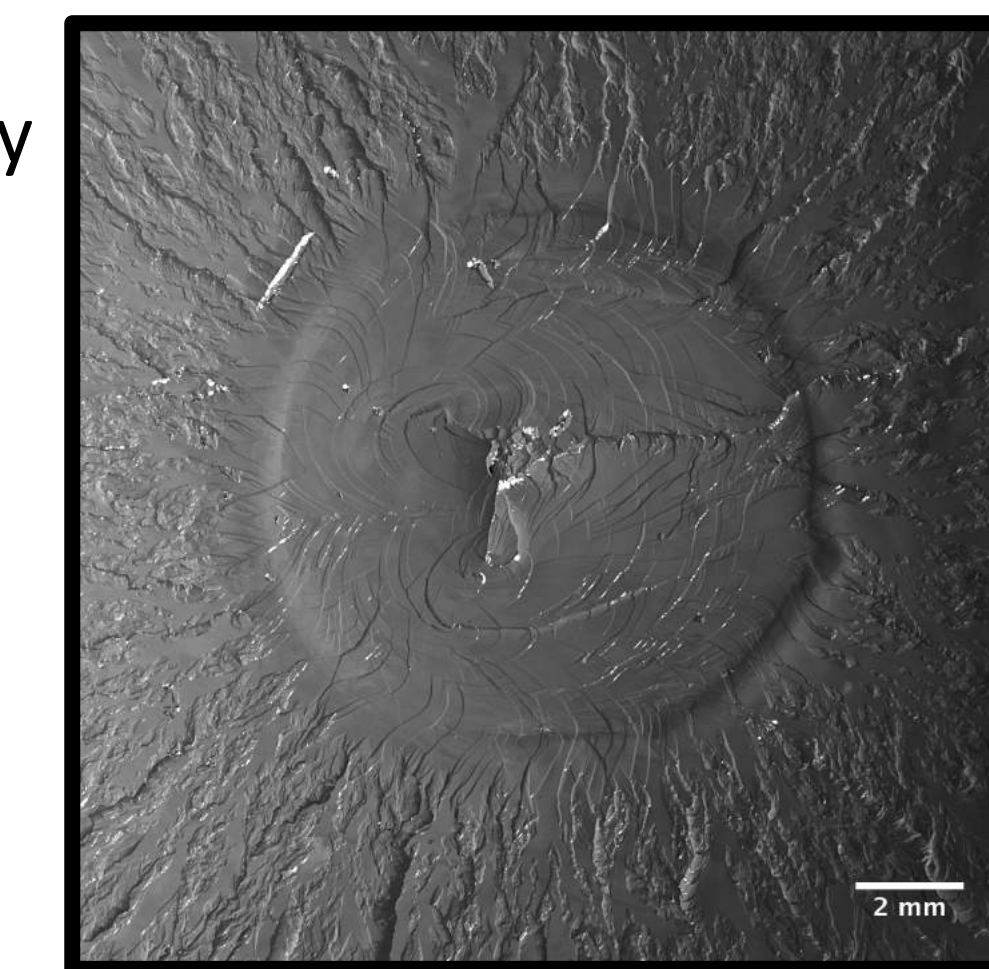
Post fracture microscopy images of the bottom fracture surface.
